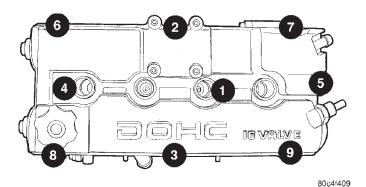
Cylinder Head Cover Tightening Sequence (Typical Cover Shown)
